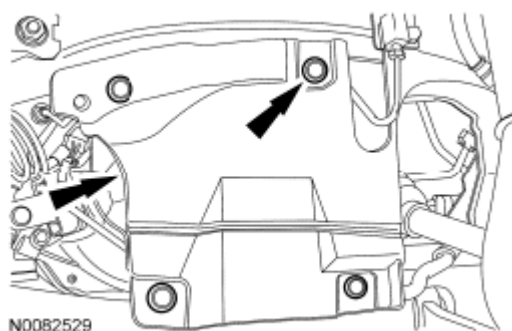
Locating Pin-Type Retainers & LH Splash Shield
